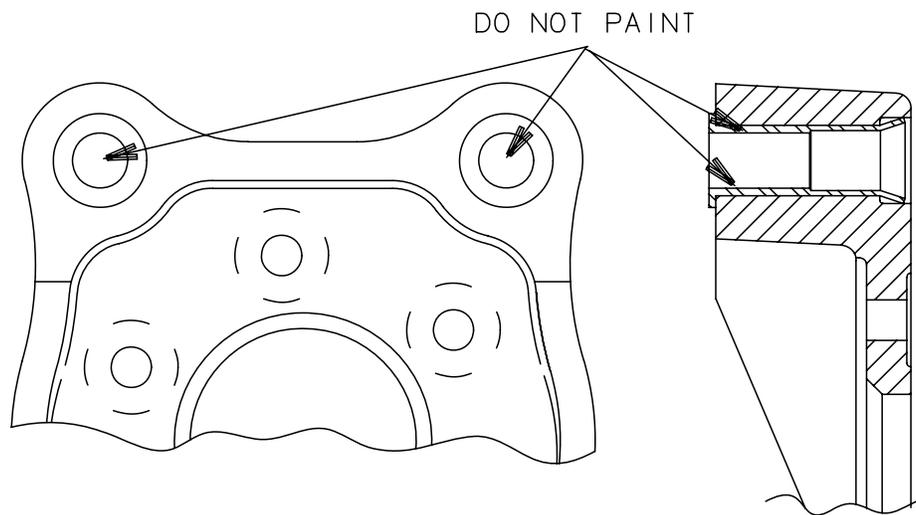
Typical Torque Plate (Cast), Painted Surfaces
